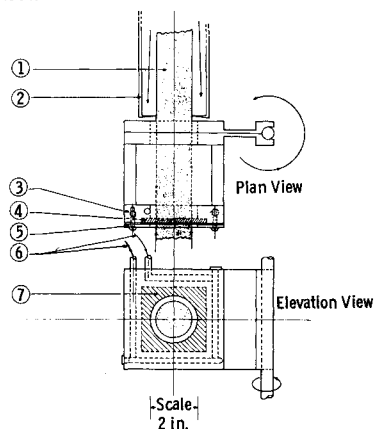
Plan and elevation view of cryogenically cooled window holder.
